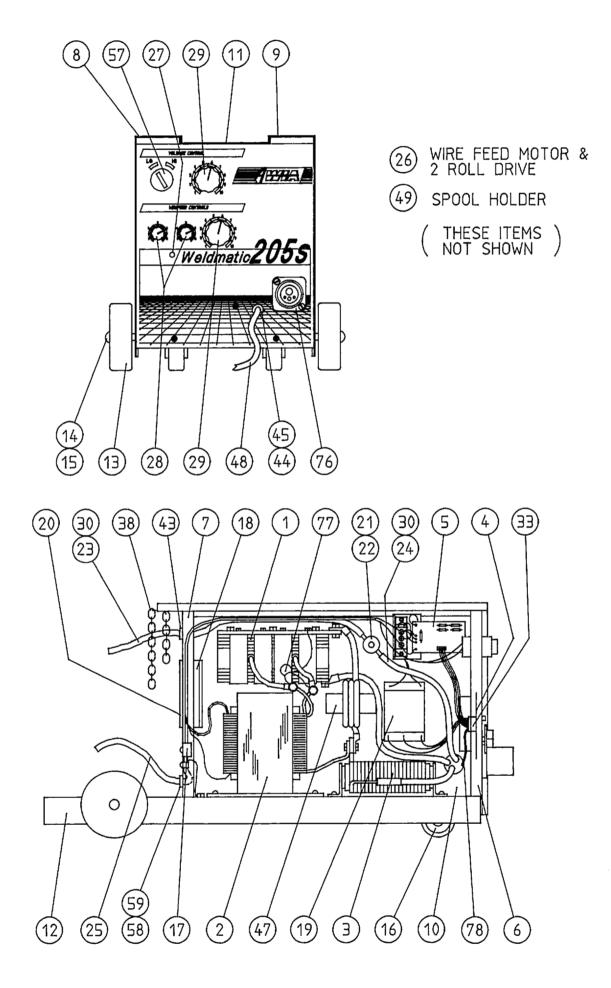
WELDMATIC 205S POWER SOURCE ASSEMBLY
